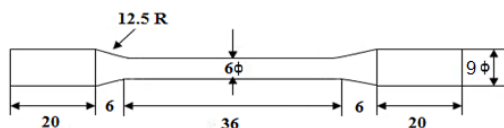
Dimensions of Tensile Sample (All dimensions are in mm).
